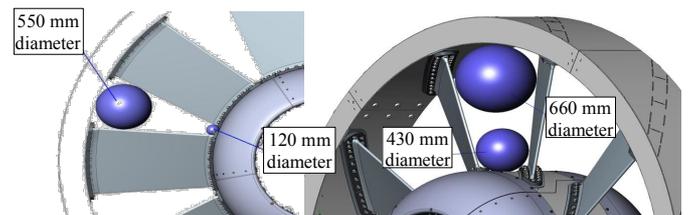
Drawings of the OpenHydro turbine blade assembly, as specified by OpenHydro, showing spacing of blade edges (left) and the spacing between blades (right). The details of the design were used in the engineering analysis.
